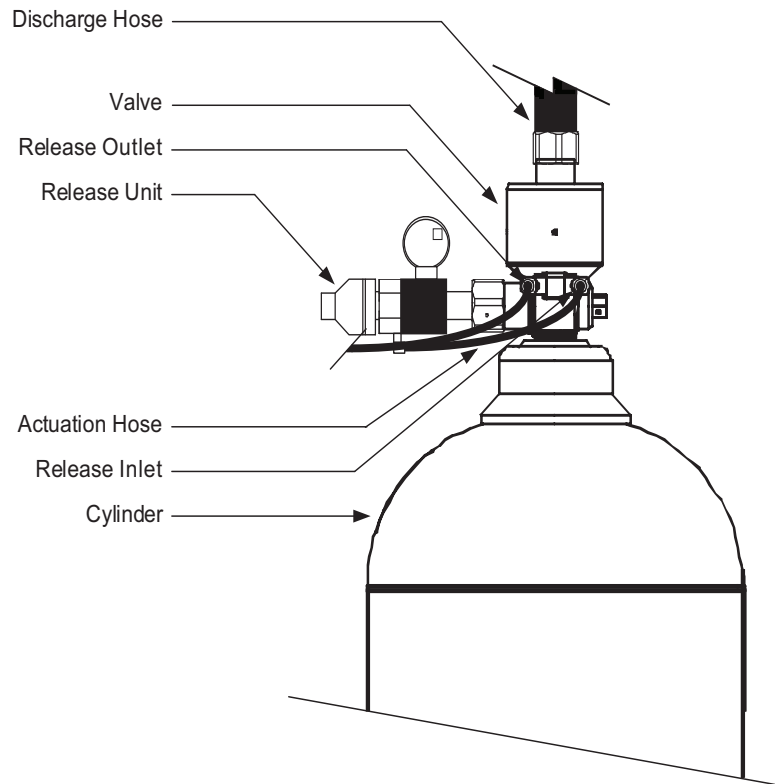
Typical Primary Cylinder/Valve Assembly (Rear View)
